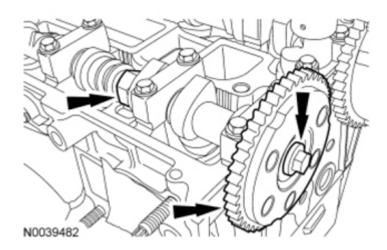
Locating Bolt And Exhaust Camshaft Sprocket Courtesy of FORD MOTOR CO.
